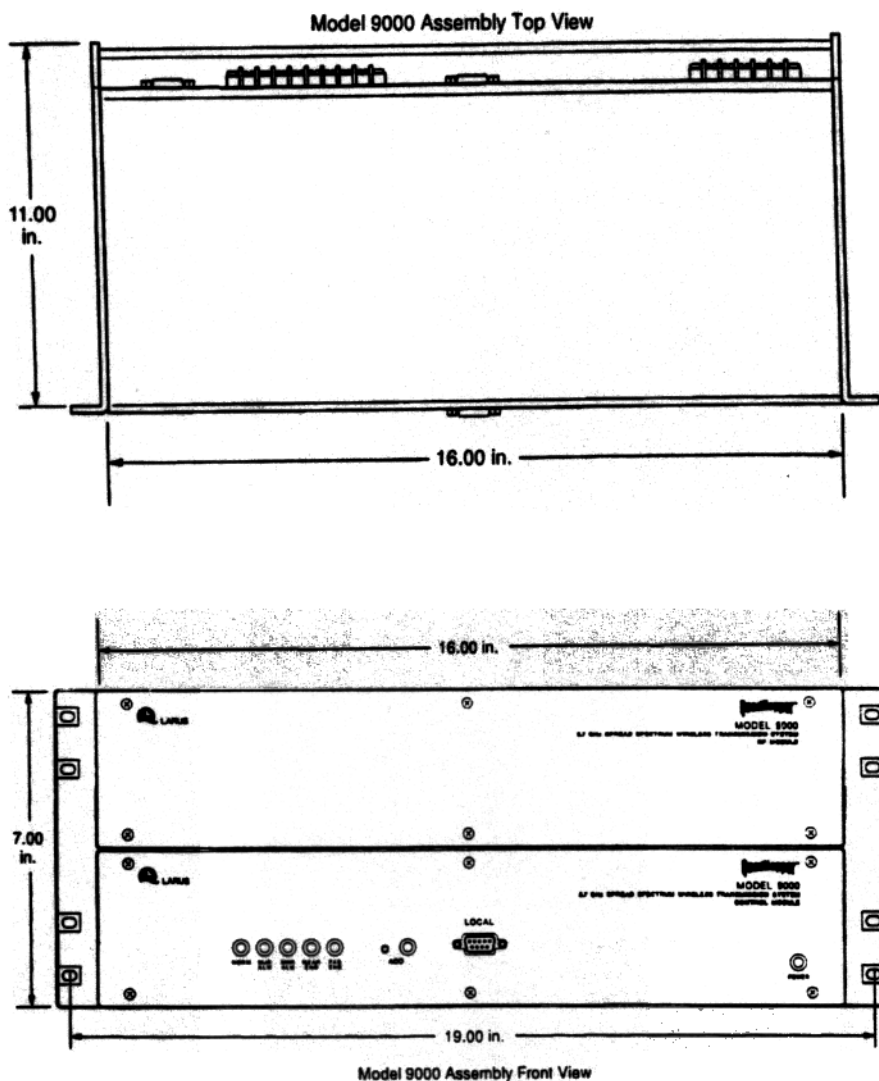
Model 9000 Assembly Dimensions and Elevations
